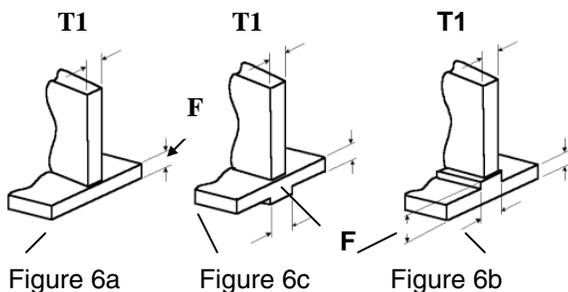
(a, b, c). Principles of T-type joint geometry (a – similar by thickness parts, b – with T-shape weld-bead, c – reverse position of Tr-shape weld-bead). F is the thickness of T-element at the future joint area.
